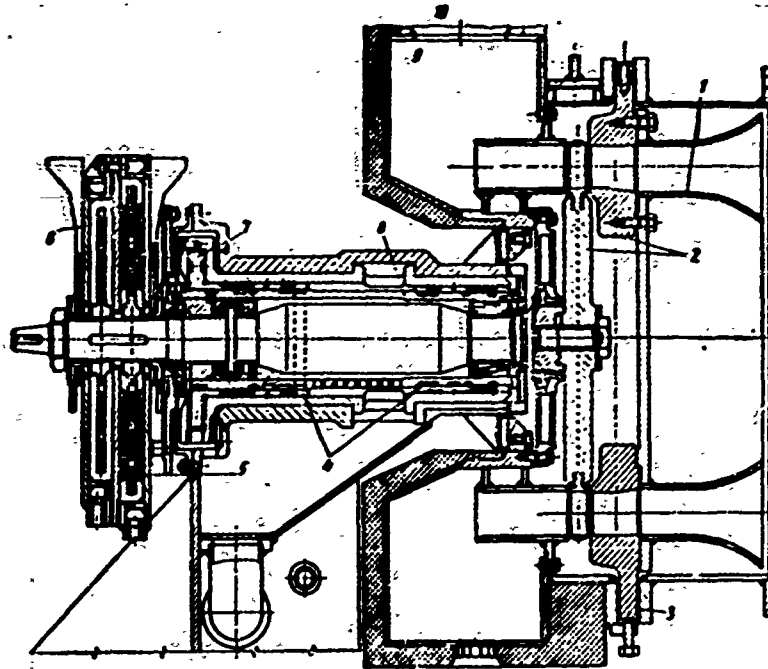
Experimental turbine 3T-11 of the Leningrad Kirov Plant: 1 - entrance section; 2 - flow passage; 3 - diaphragm attachment; 4 - hydraulic bushings; 5 - insertable blades of water brake; 6 - water brake; 7 - hydraulic pivot; 8 - floating journal; 9 - exhaust chamber; 10 - exhaust duct.
